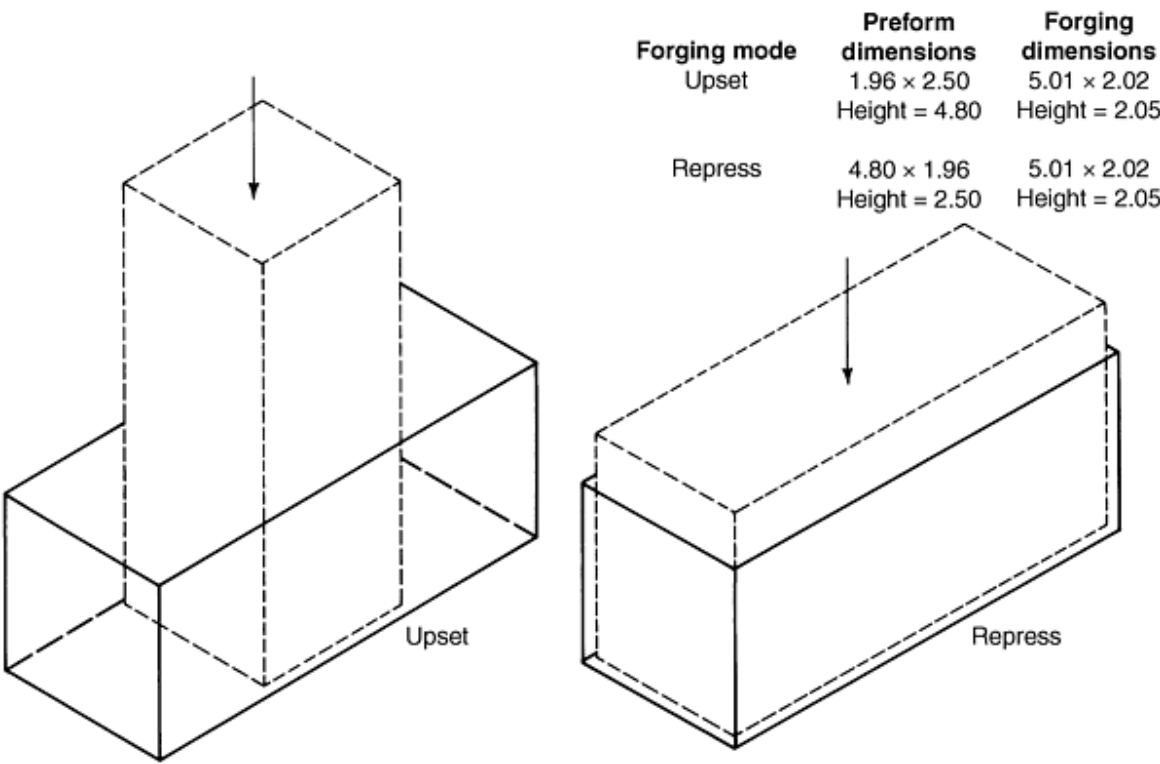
Forging modes used in production of billets for mechanical testing. Dimensions, given in inches, are average values.
